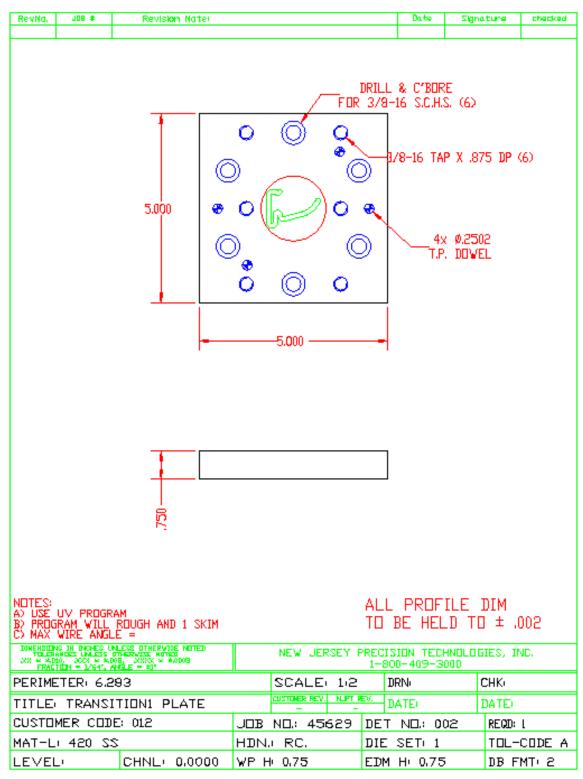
Drawing sheet generated for Job 45629 depicting Transition 1 plate.
